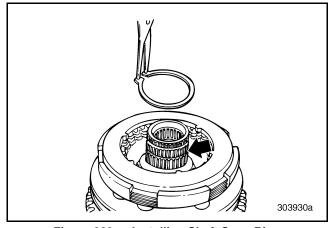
Installing Shaft Snap Ring (T313L/T318L Shown)
